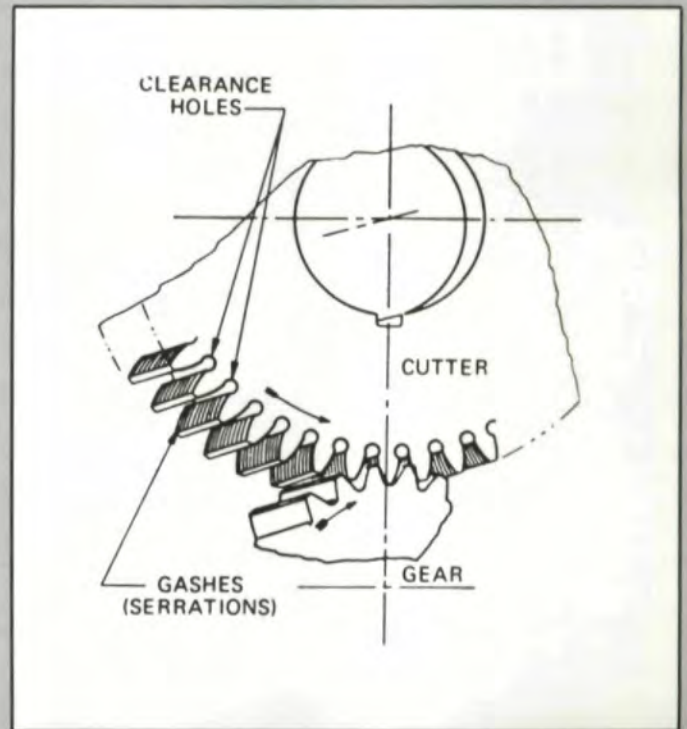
Work gear in crossed axes mesh with rotary shaving cutter mounted above.
